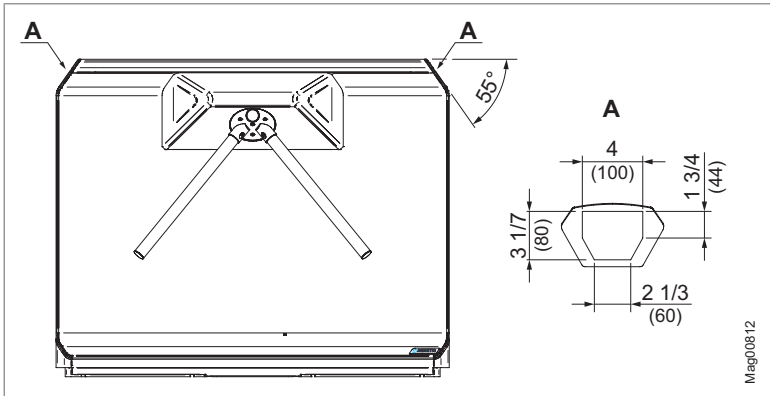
Installation space for access-control device (Dimensions in inch are without parenthesis. Dimensions in mm are in parenthesis.)
